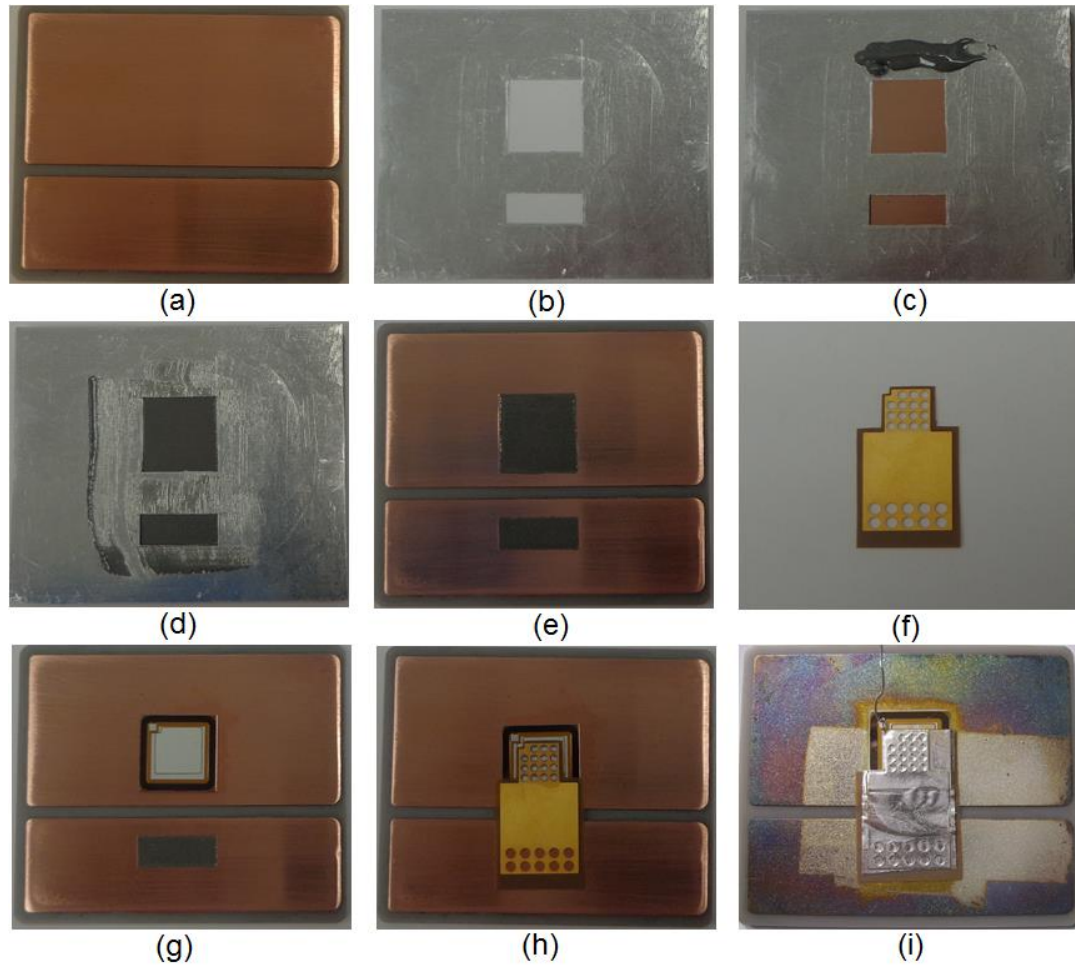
Sample preparation (a) two island DBC substrate (b) Aluminium mask (c) Mask placed on the substrate with silver paste applied to the mask (d) silver paste spread using squeegee (e) mask removed from the substrate (f) Flexible PCB (g) IGBT placed over the silver paste (h) flexible PCB placed on the IGBT and substrate (i) Final test vehicle after sintering and wirebonding gate contact.
